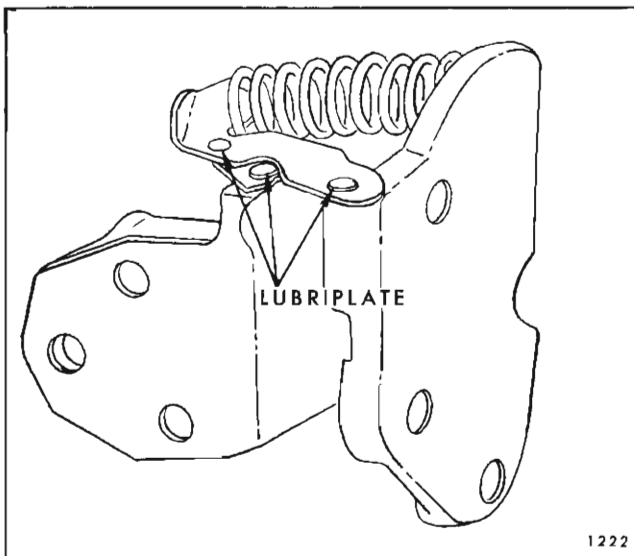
B1—Front Door Hinge Hold Open: Lubrication of Rear Door Hinge Hold Open Typical
